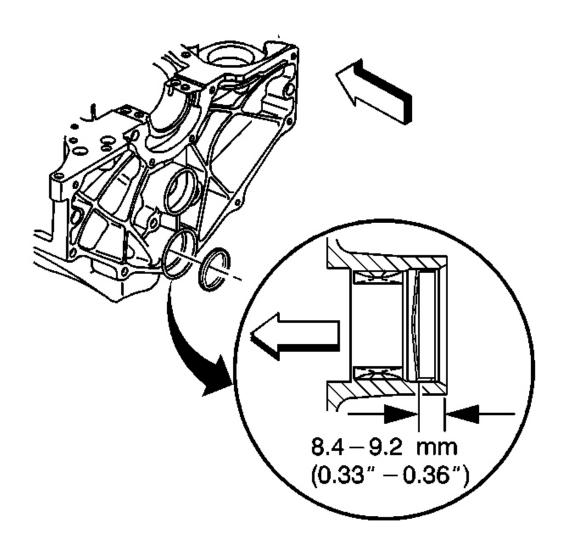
Installing Expansion Cup Plug Into Balance Shaft Rear Bearing Bole Courtesy of GENERAL MOTORS CORP.
